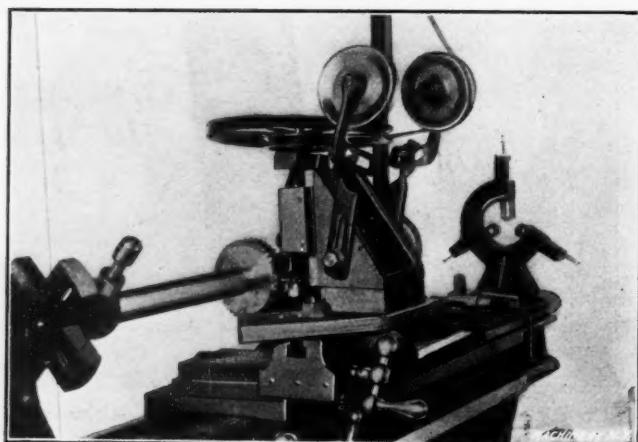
Drilling Spindle in Process of Gashing a Worm-wheel
